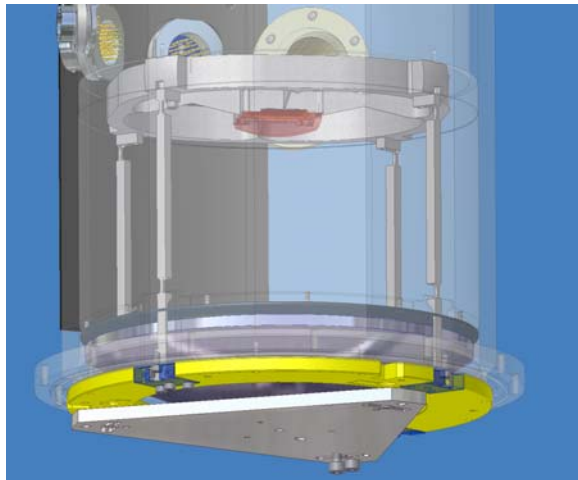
solid model of VIRUS-P camera, showing the mirror mount and adjuster at the lower part of the assembly, invar spacing, rods, and the detector assembly. The detector mount is a stainless steel spider designed for minimum obstruction of light. The field flattener lens has a red color in this rendering and is mounted to the center of the spider.
